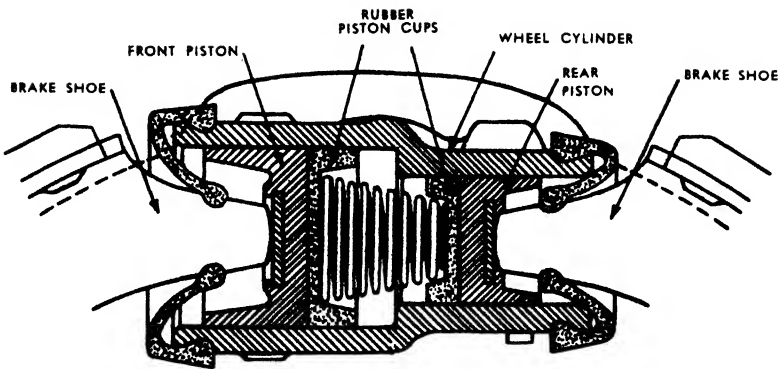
HYDRAULIC BRAKE WHEEL CYLINDER.
